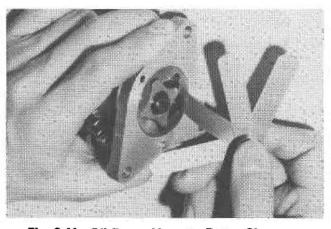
Oil Pump Vane to Rotor Clearance
